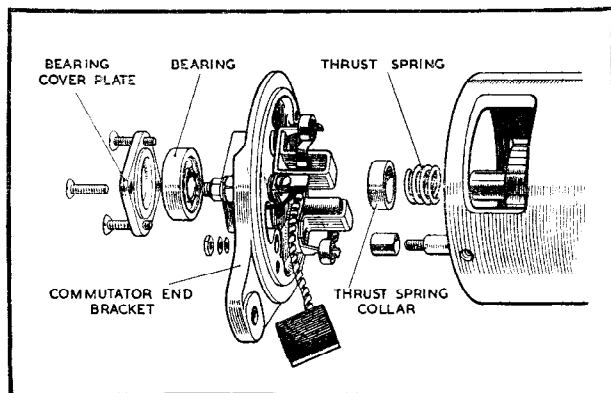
Commutator end bearing details (generators C45PVB, C45PVS, etc., earlier models)
